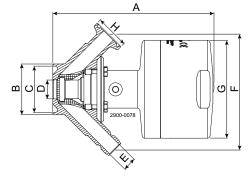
Pneumatic with valve body: Collared pipe welding
